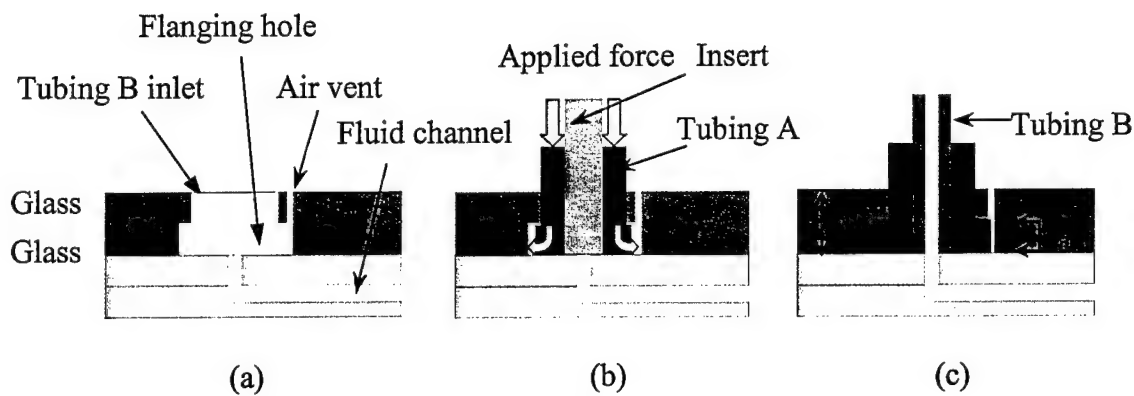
Schematic illustration of the surface mounting technique on a fluidic motherboard
